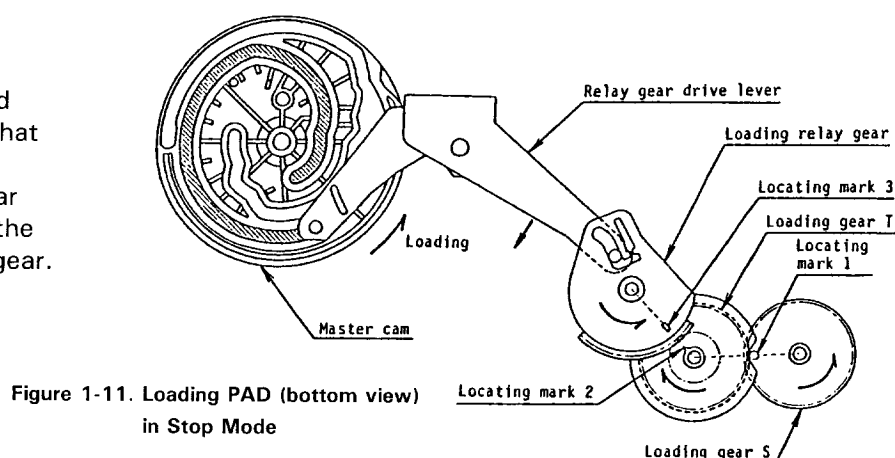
Loading PAD (bottom view) in Stop Mode
